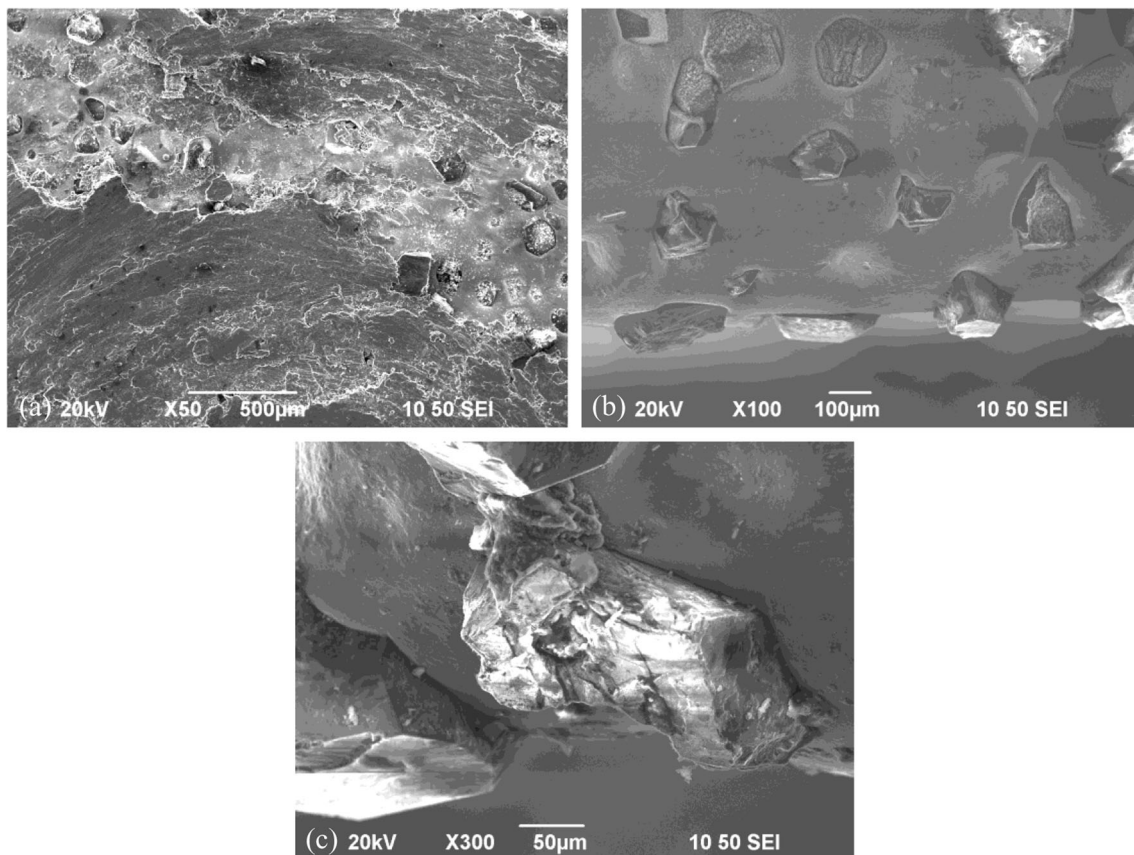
SEM photographs showing the tool surfaces after machining the MMC under a processing condition A, b processing condition B, and c processing condition C
